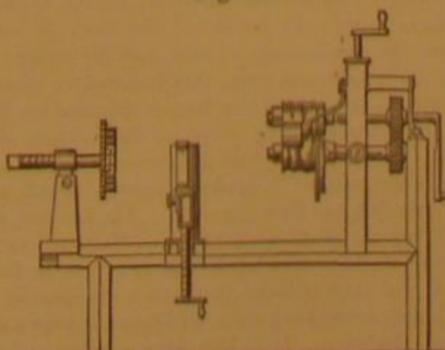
is a machine of the nature of a screw stock to cut a thread on the end of a wrought iron pipe. It is fitted for hand power, motion being transmitted to the several parts by means of gearing; the pipe is shown projecting toward the left, and is held stationary by the adjustable jaws of the pipe vise. The pipe passes through the center of the gear wheel, the rotary motion of which is imparted to the die in the die box by means of studs or guides upon which the die box freely slides forward as the die passes upon the pipe.
